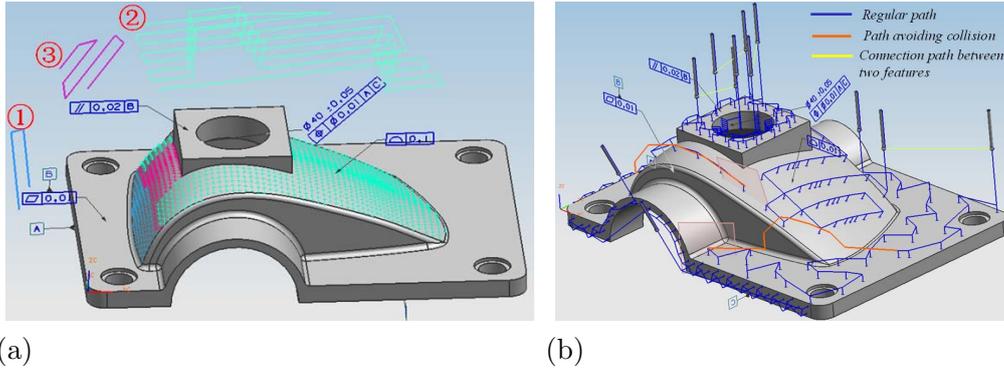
Inspection paths for the studied case (a) laser scan paths; (b) tactile paths
